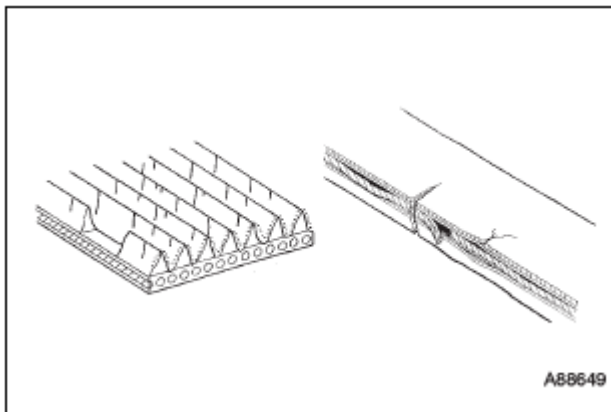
Identifying Wear Or Cracks On Fan And Generator V-Belt
